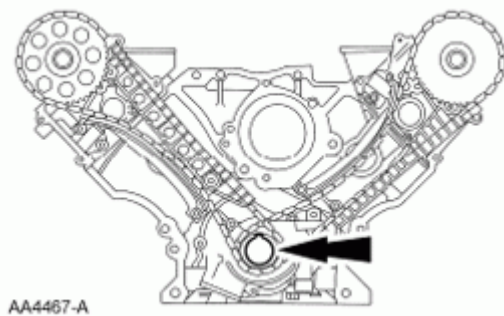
Locating Crankshaft Keyway At 12 O'Clock Position
